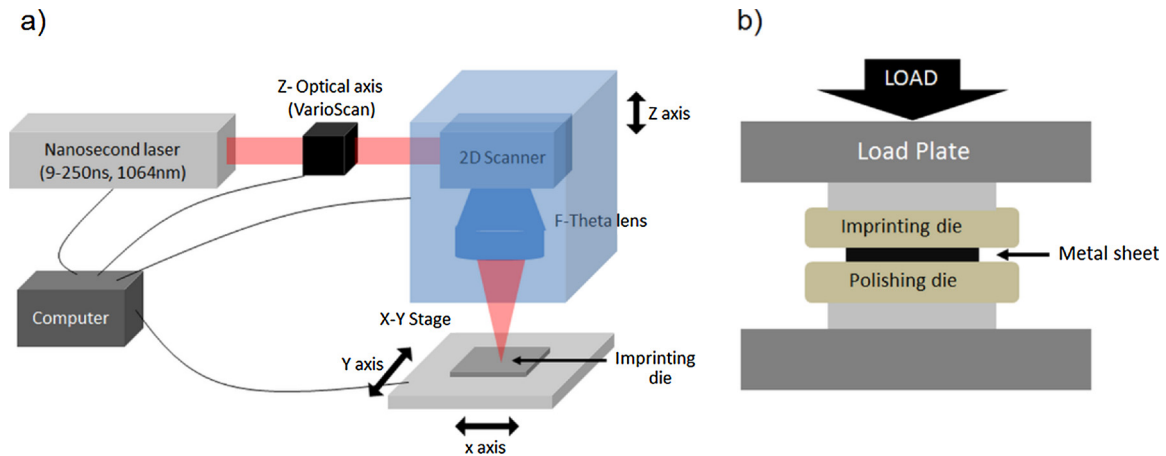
Schematic view of a) laser experimental setup; b) imprinting tests.
